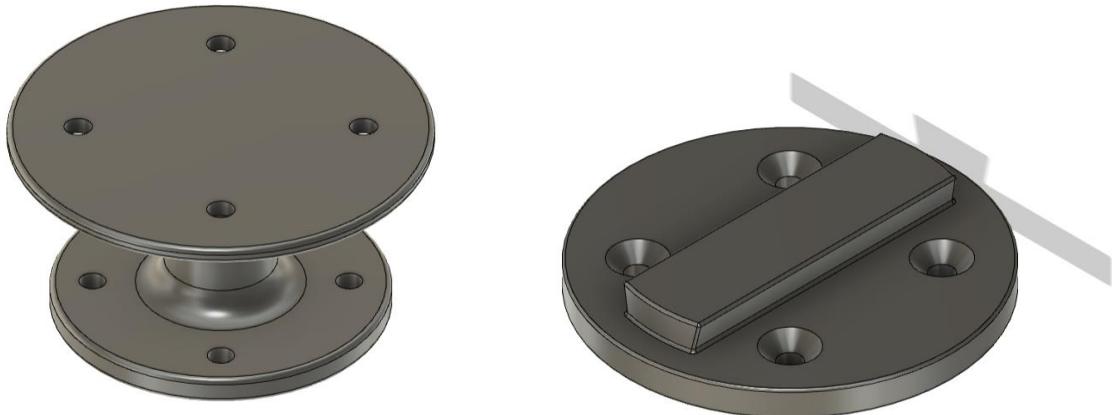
Mounts that Accurately attaches to the UR5 COBOT
